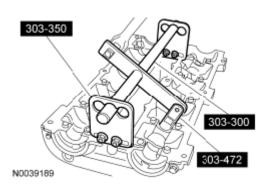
Compressing Valve Spring Courtesy of FORD MOTOR CO.
